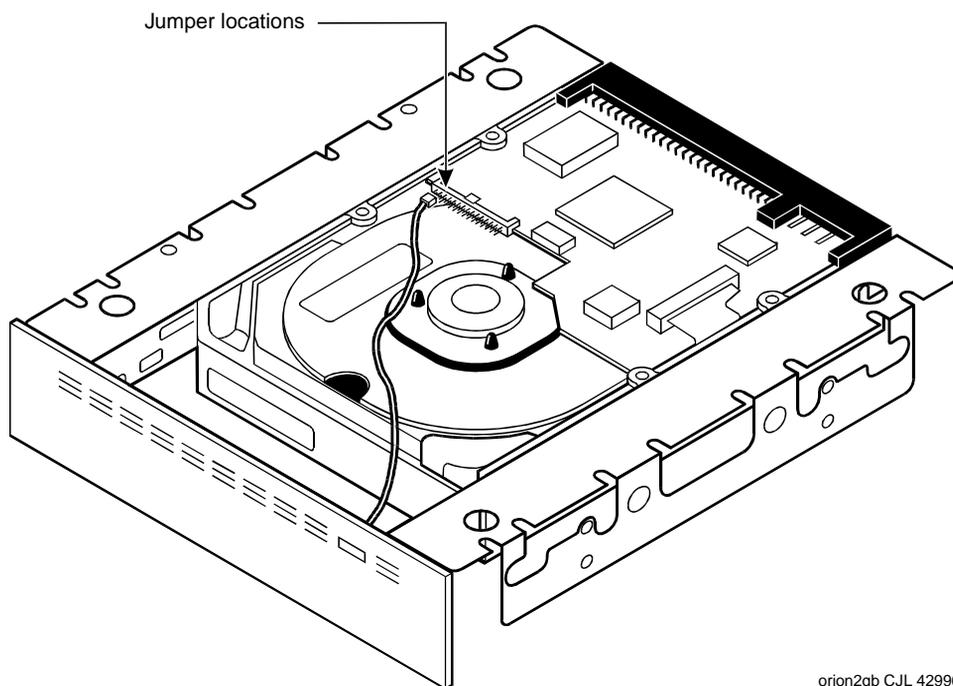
Jumper Settings for the Second Type A Hard Disk Drive Installed;
